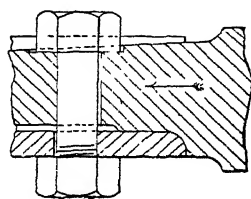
FITTING CASTING TO CHANNEL SECTION
